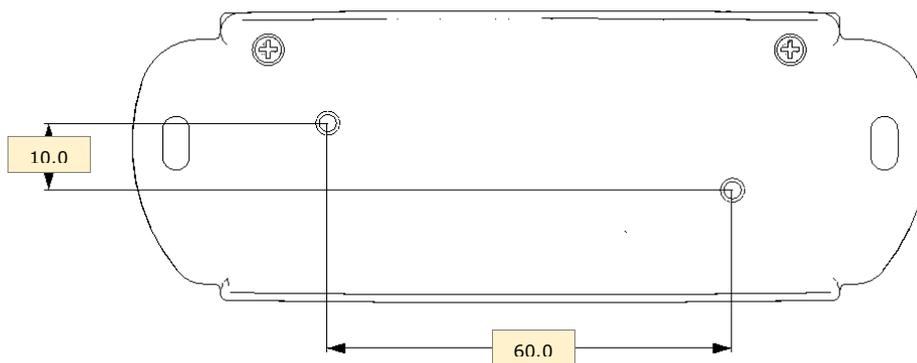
LDSBus USB Adapter Dimension – Bottom View
